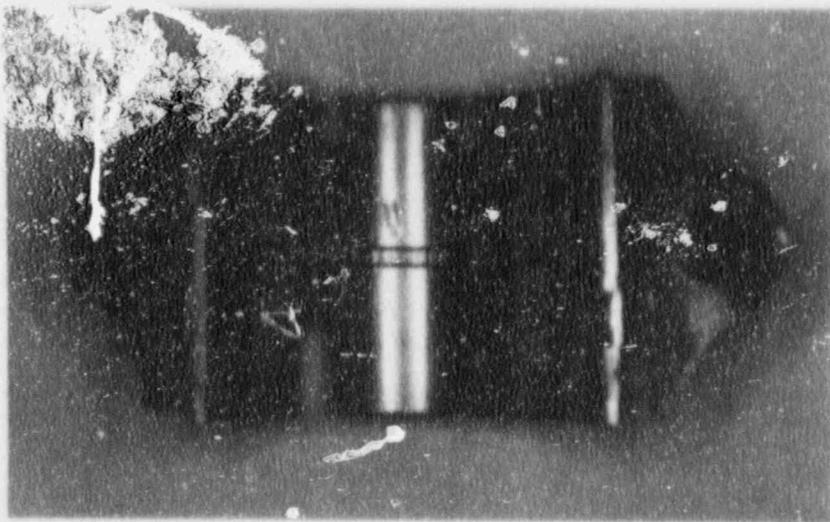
View of the bearing surface of bearing block number 1. Note, there is no loss of lubrication damage, which supports the accepted failure scenario, where the initiating event was the bearing cap coming loose.
